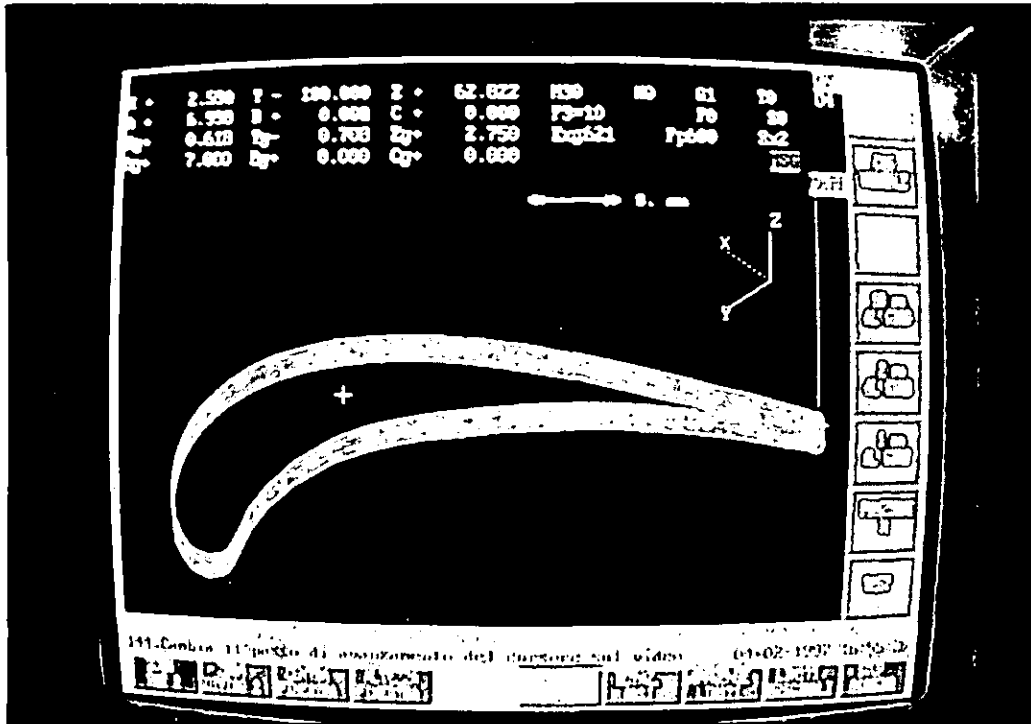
LASER WELDING PROGRAM FOR THE BLADE TIP
